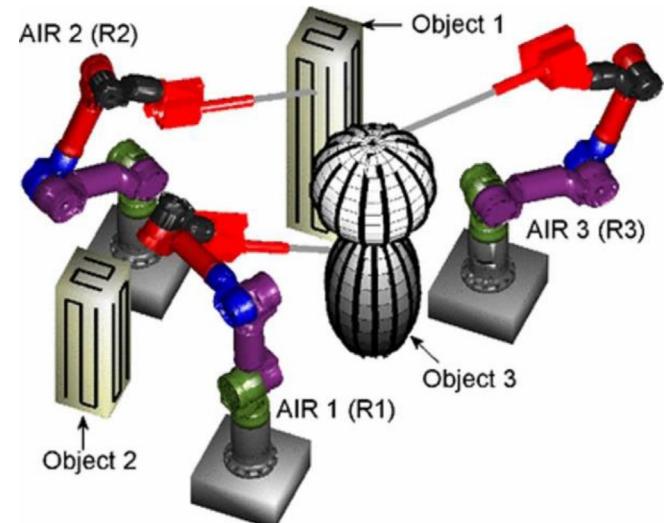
Autonomous industrial robots performing grit-blasting or spray painting [100].
